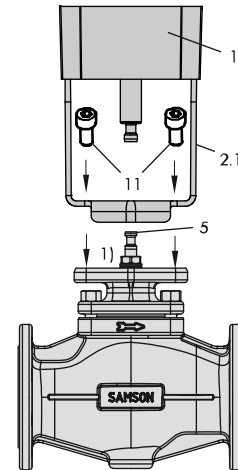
Mounting · Version with actuator yoke and V2001 accessories
